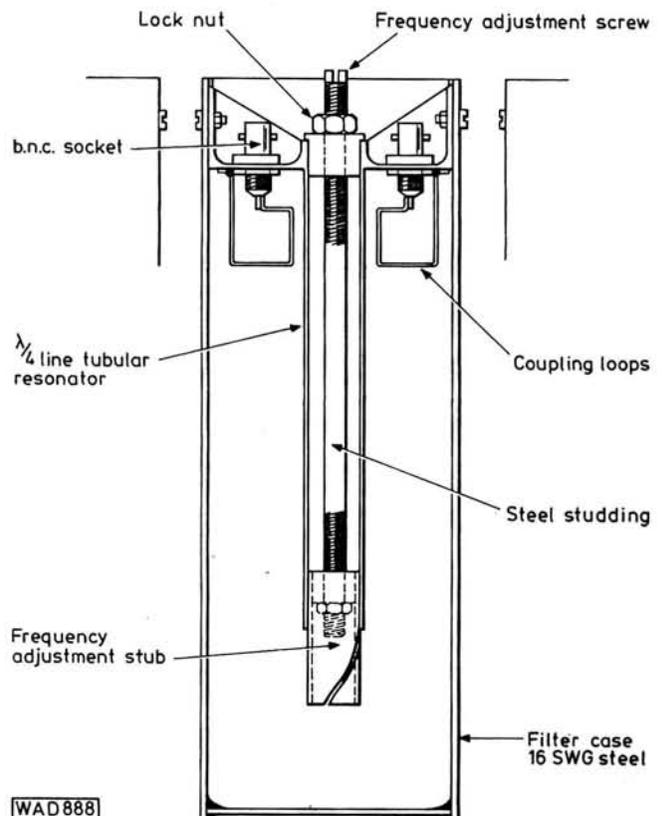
Cross-section of high Q cavity developed by Roy Powers G8CKN. Internal faces are silver plated
